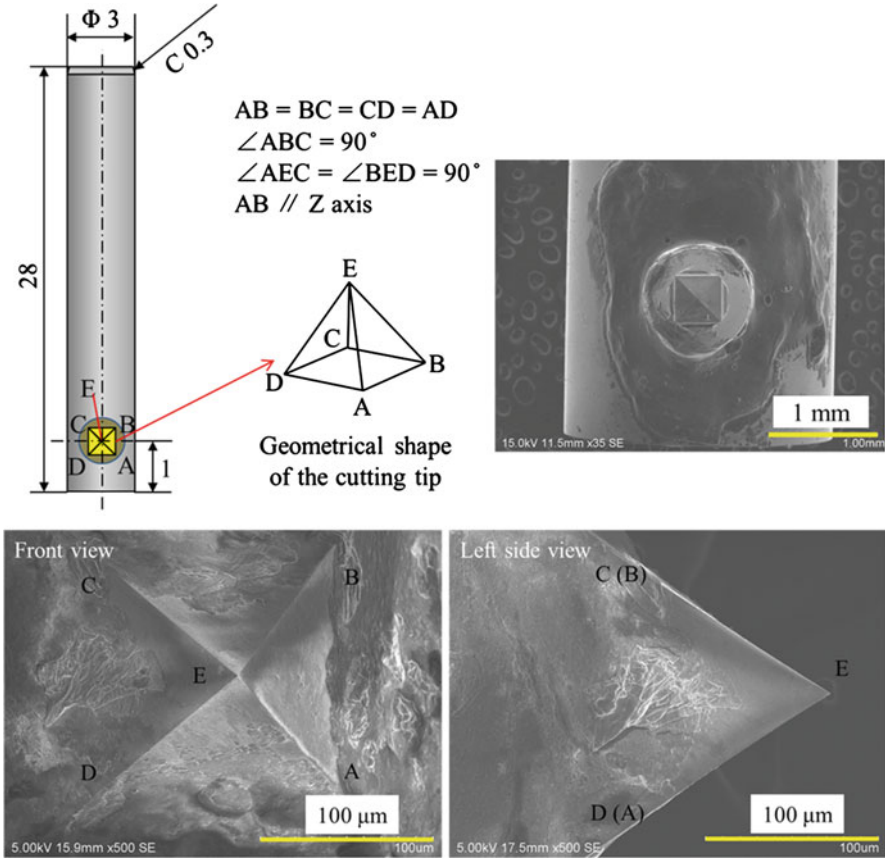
The geometrically defined one-point diamond tool with a square pyramid cutting tip (Xu et al. 2016)
